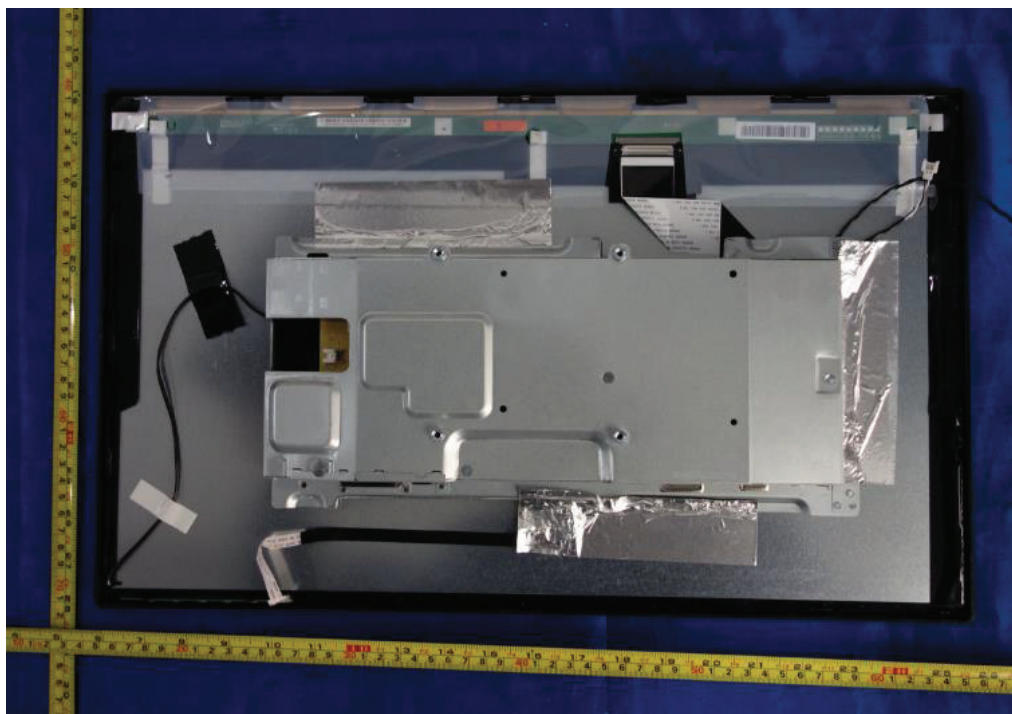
Metal enclosure type B with power board 715G7300 and main board 715G9494
